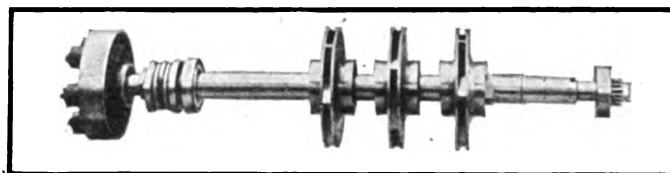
The shaft and centrifugating wheels of the Sulzer pump
